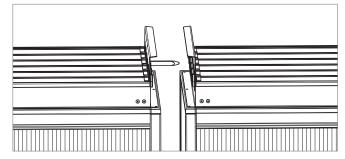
Connecting bolts for damper connection for partitioned exchangers
